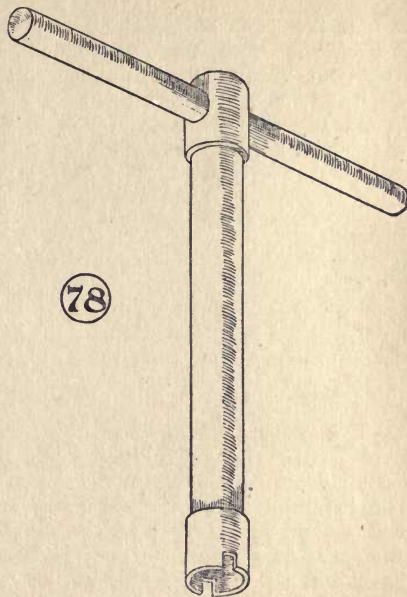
Slotted tool for removing and replacing the spray nozzle on the Holley carbureter
